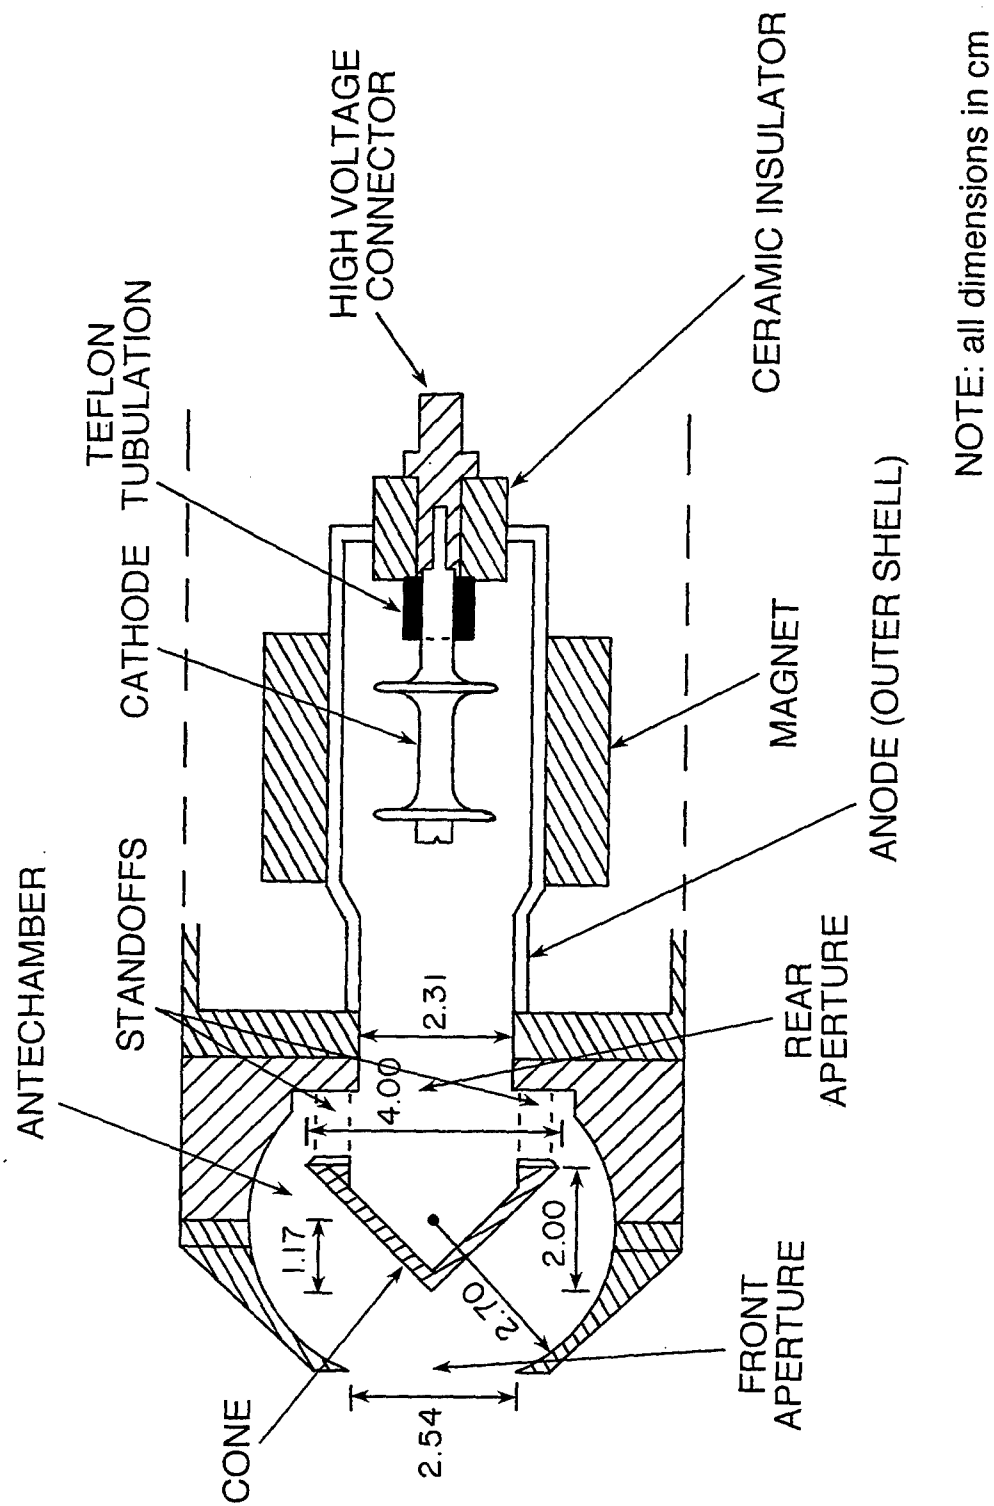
Schematic Drawing of the PG Antechamber and Cold-Cathode Gauge
